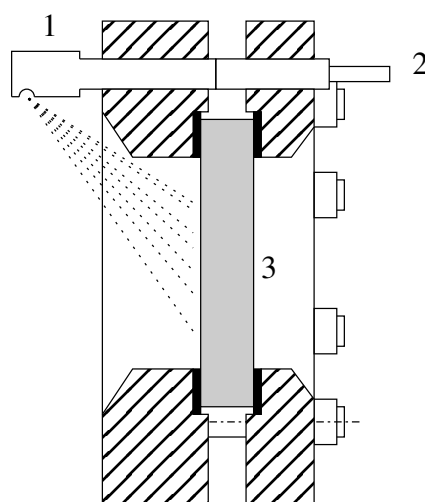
Window assembly and a spray device. (1) spray head, (2) gas inlet, (3) glass.
